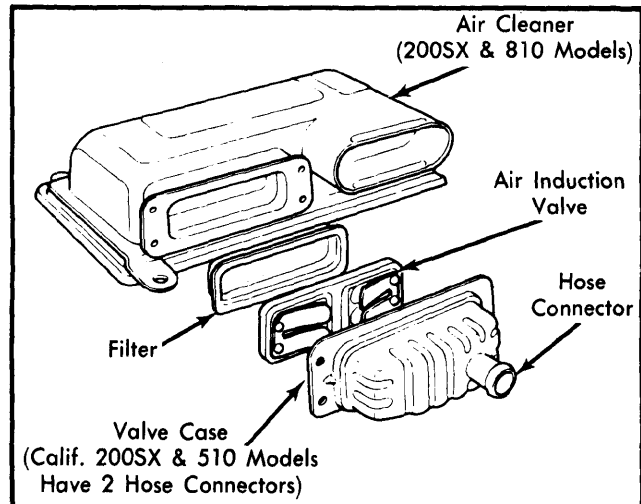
Exploded View of Air Induction Components (Except 280ZX Models)
